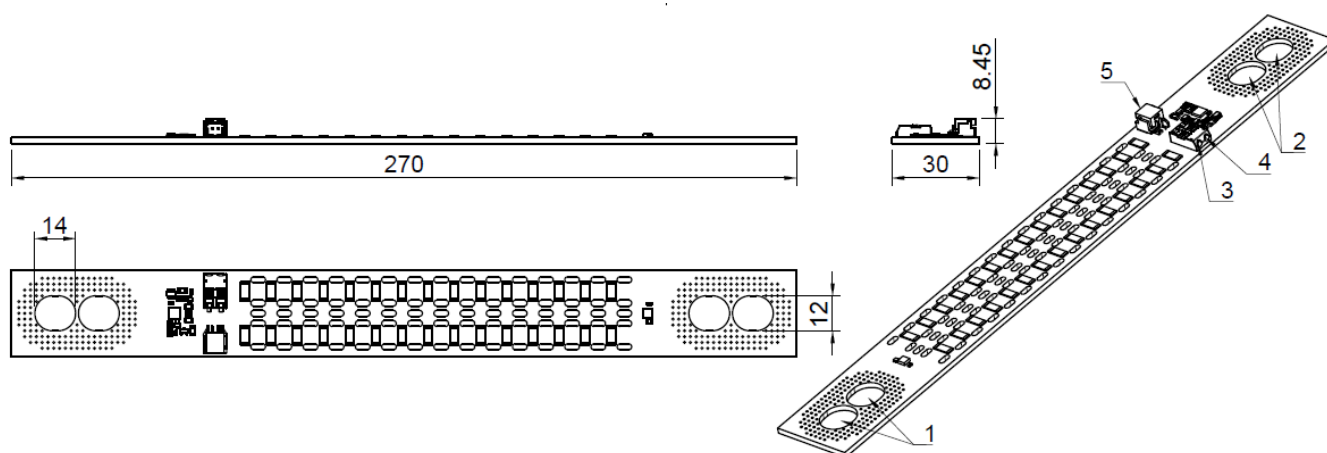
EMUS G1 Control Module 200-400Ah (CM051A) mechanical drawing. All dimensions in millimeters.
